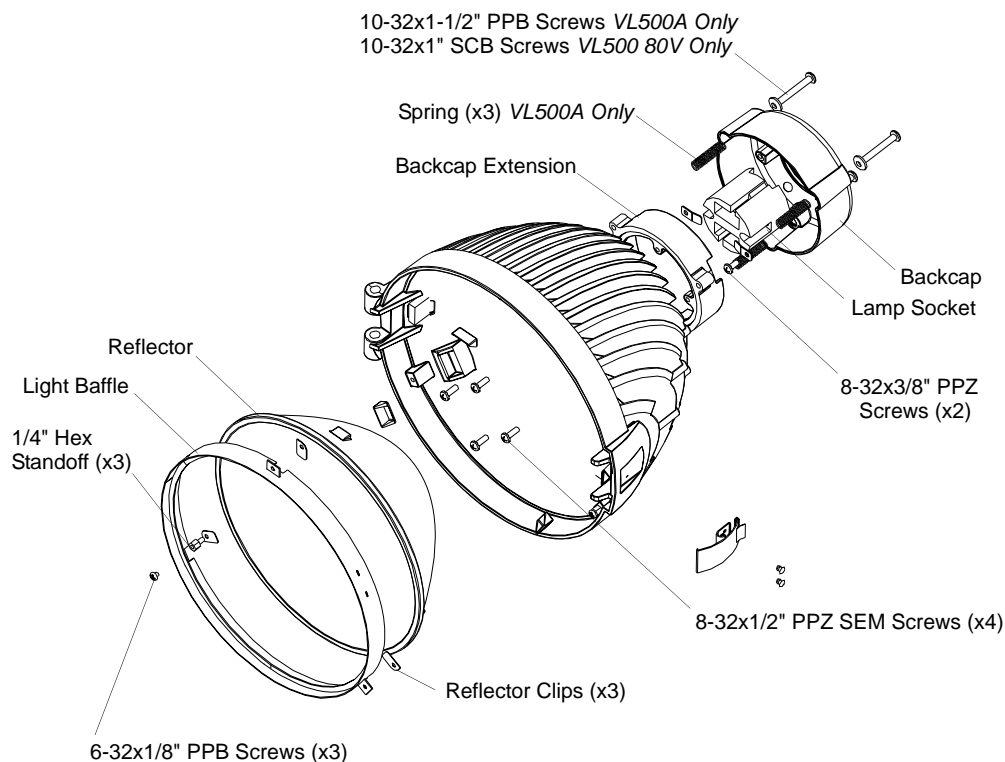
Accessing the Lamp Socket in VL500A and VL500 80V Fixtures
